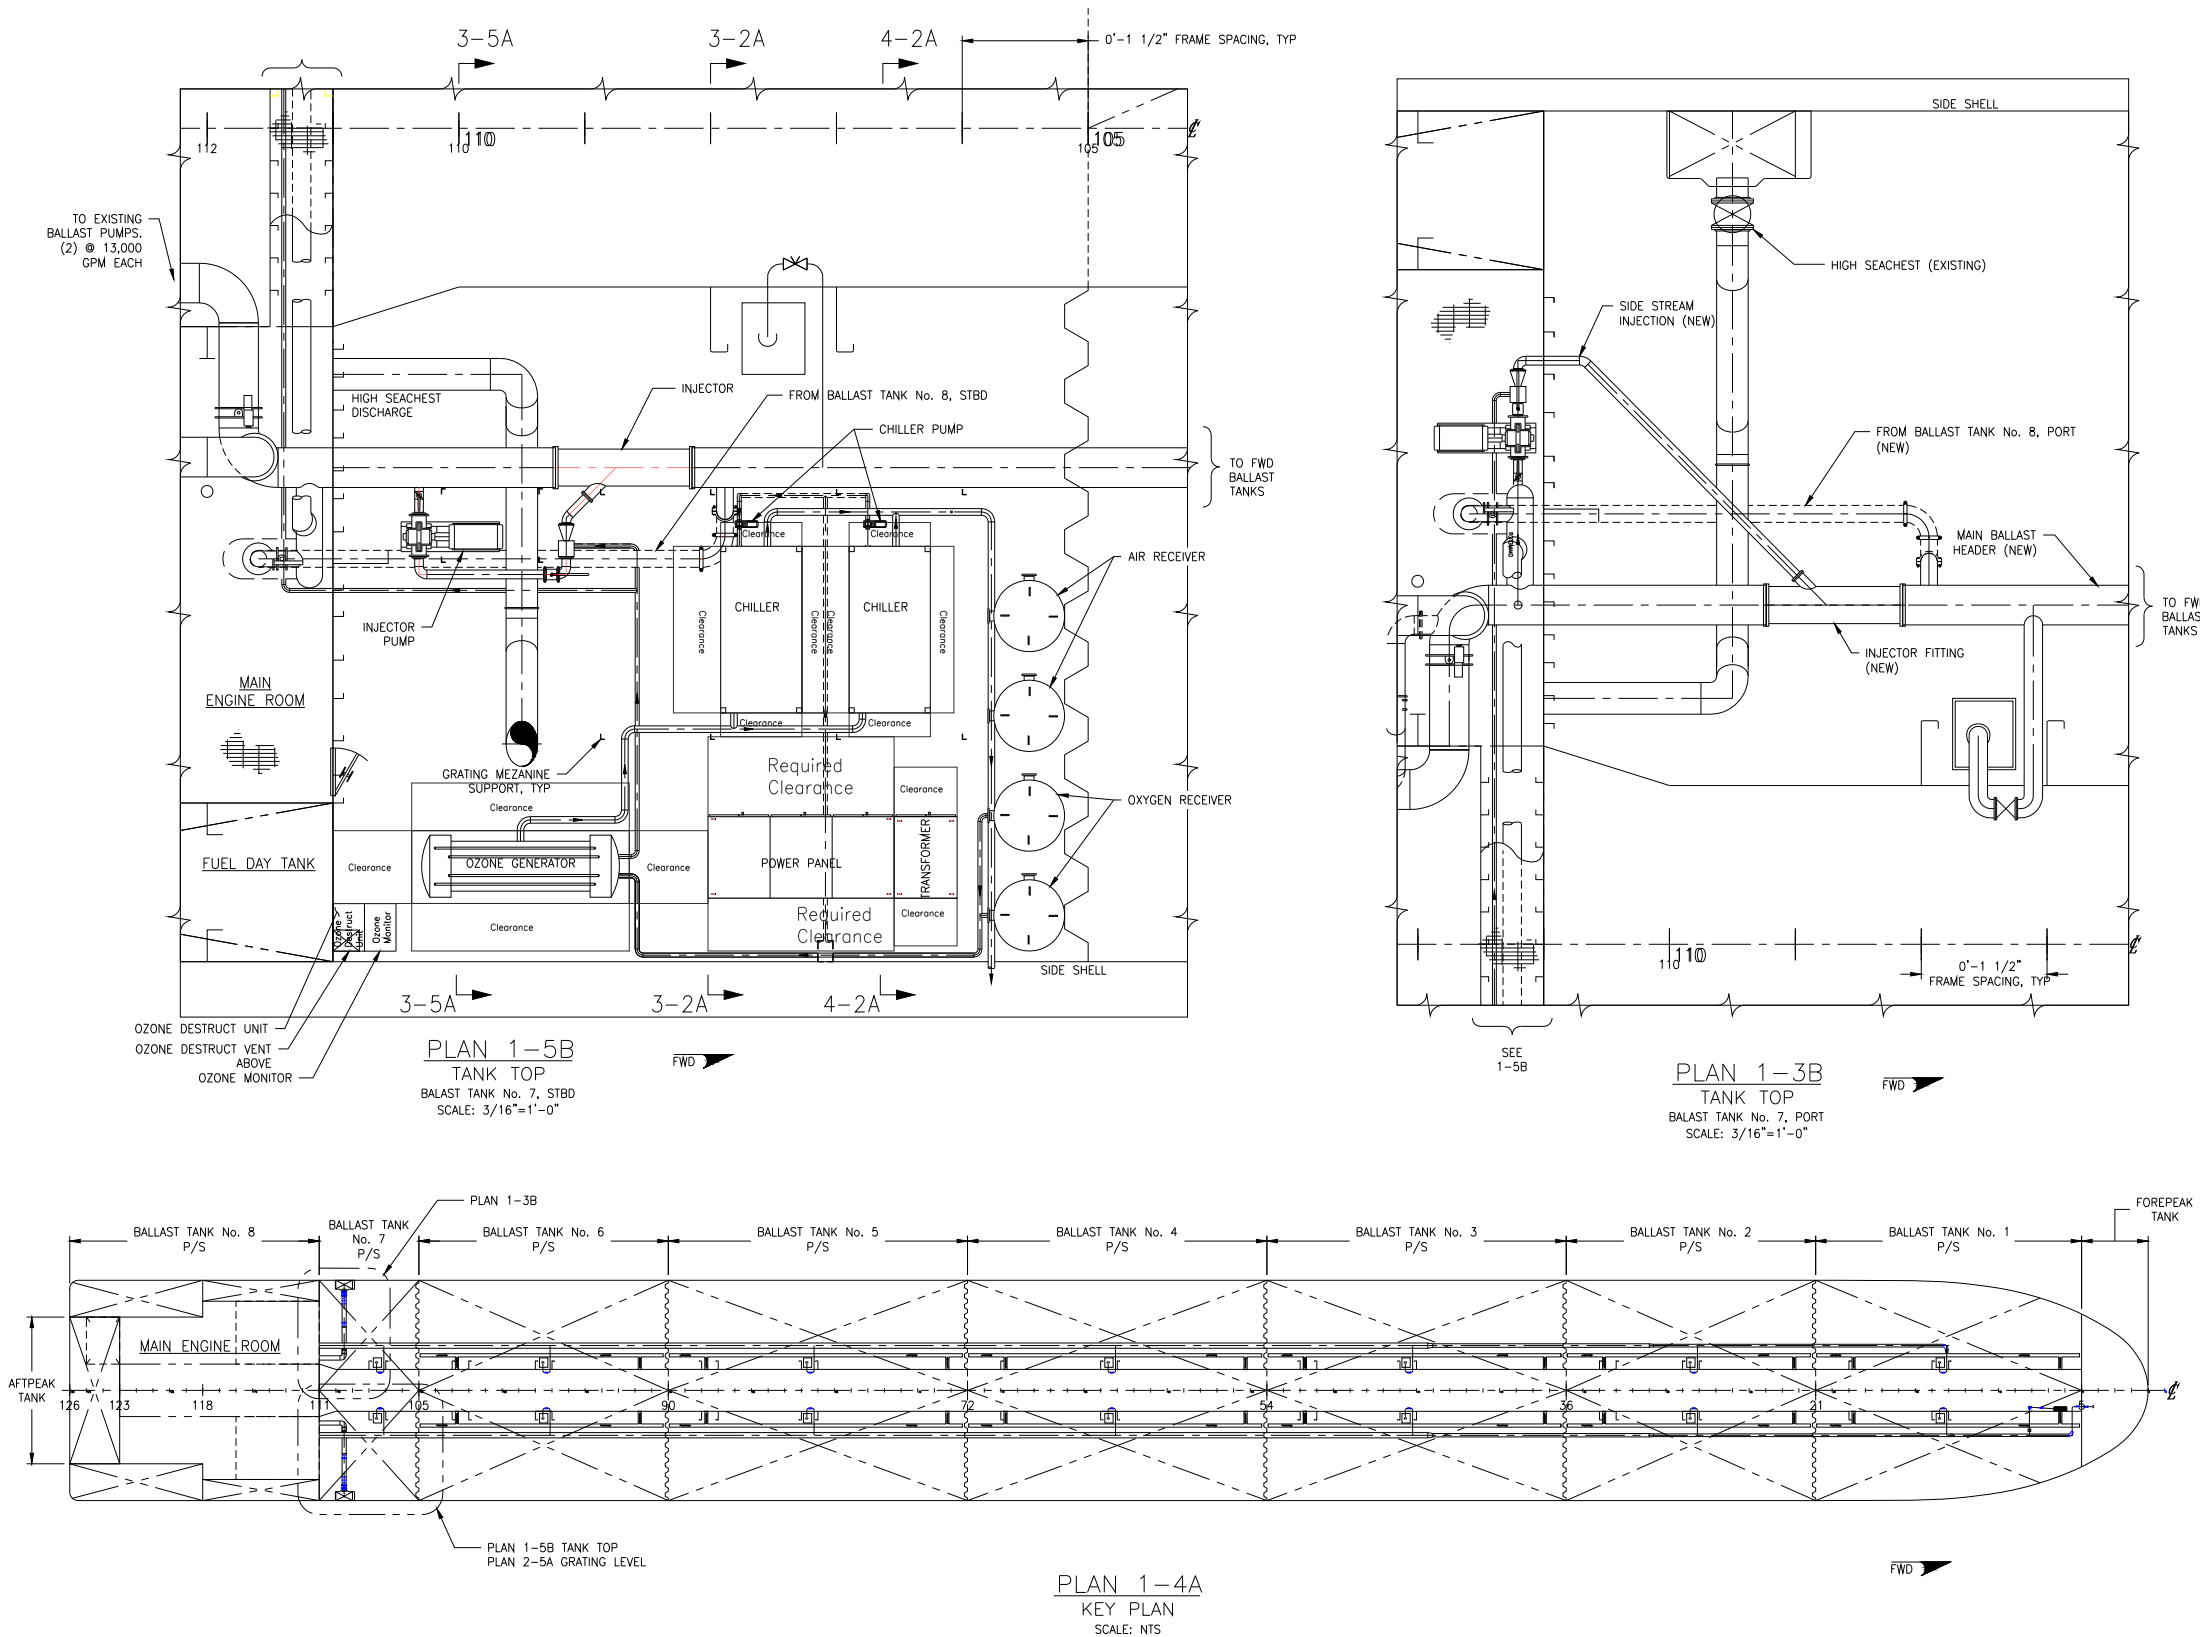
Vessel Two, BWT System 2 (ozone BWT System): general arrangement and piping installation (1 of 4).
